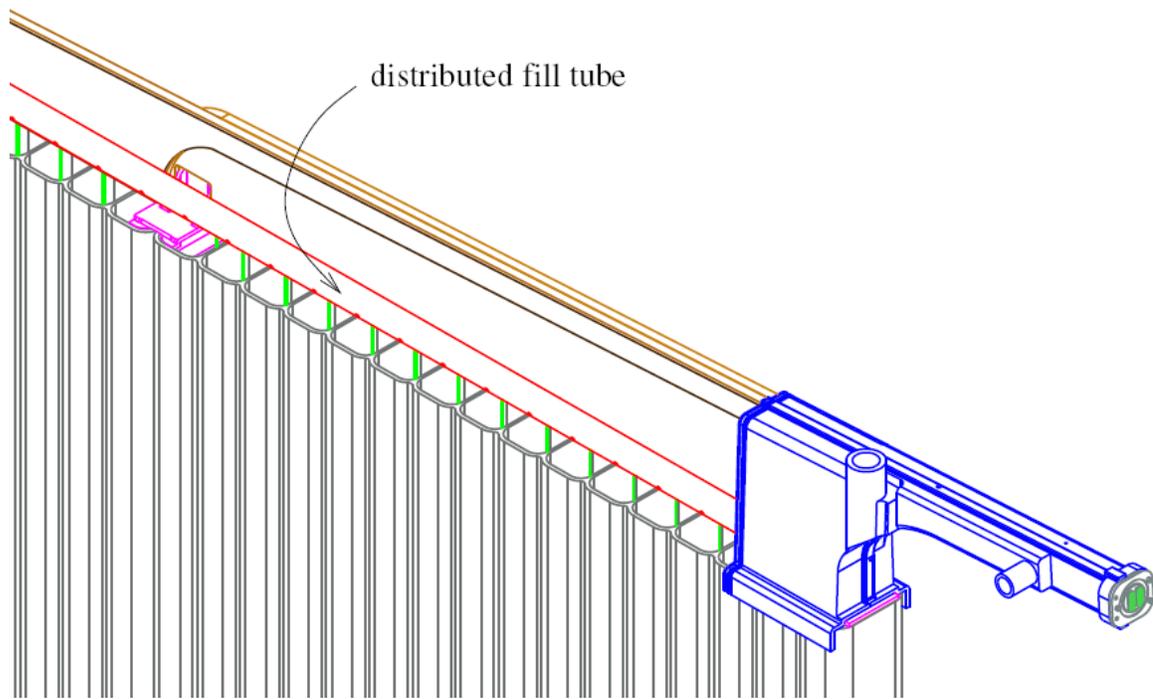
A cutaway of the manifold showing the snout with the fill and vent ports. The tube to distribute the liquid scintillator to the 32 cells of the extrusion assembly is also shown.
